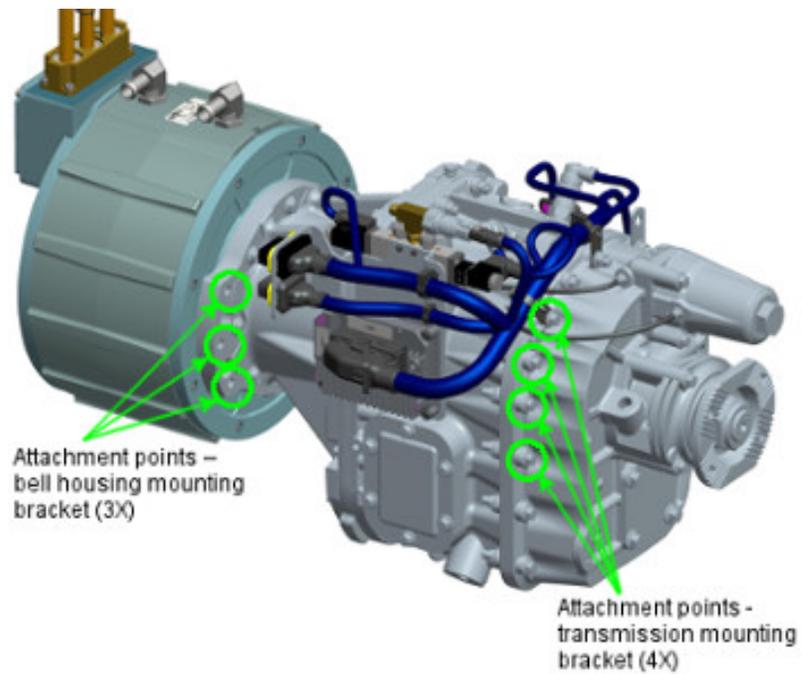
Right Side – attachment points for bell housing & transmission mounting brackets.
